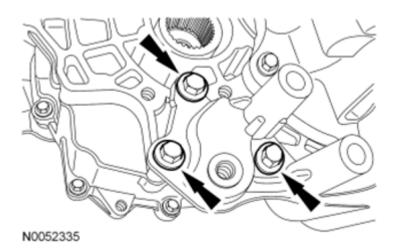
Identifying Transaxle Bracket Bolts Courtesy of FORD MOTOR CO.
